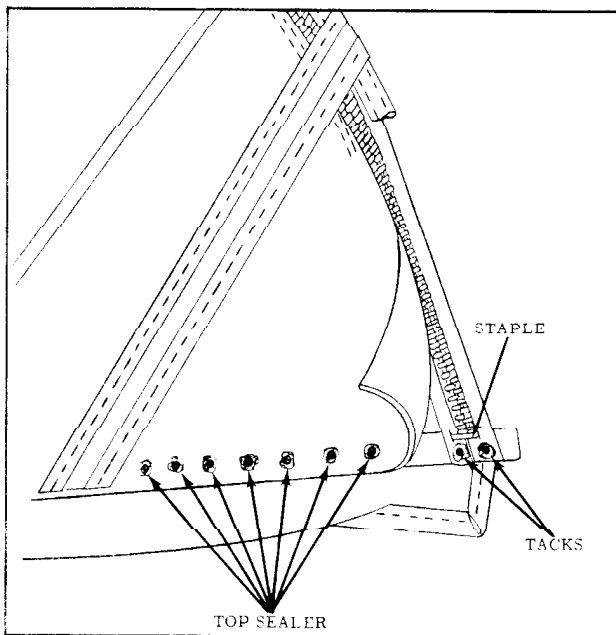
Sealing at Rear Quarter Trim Stick
